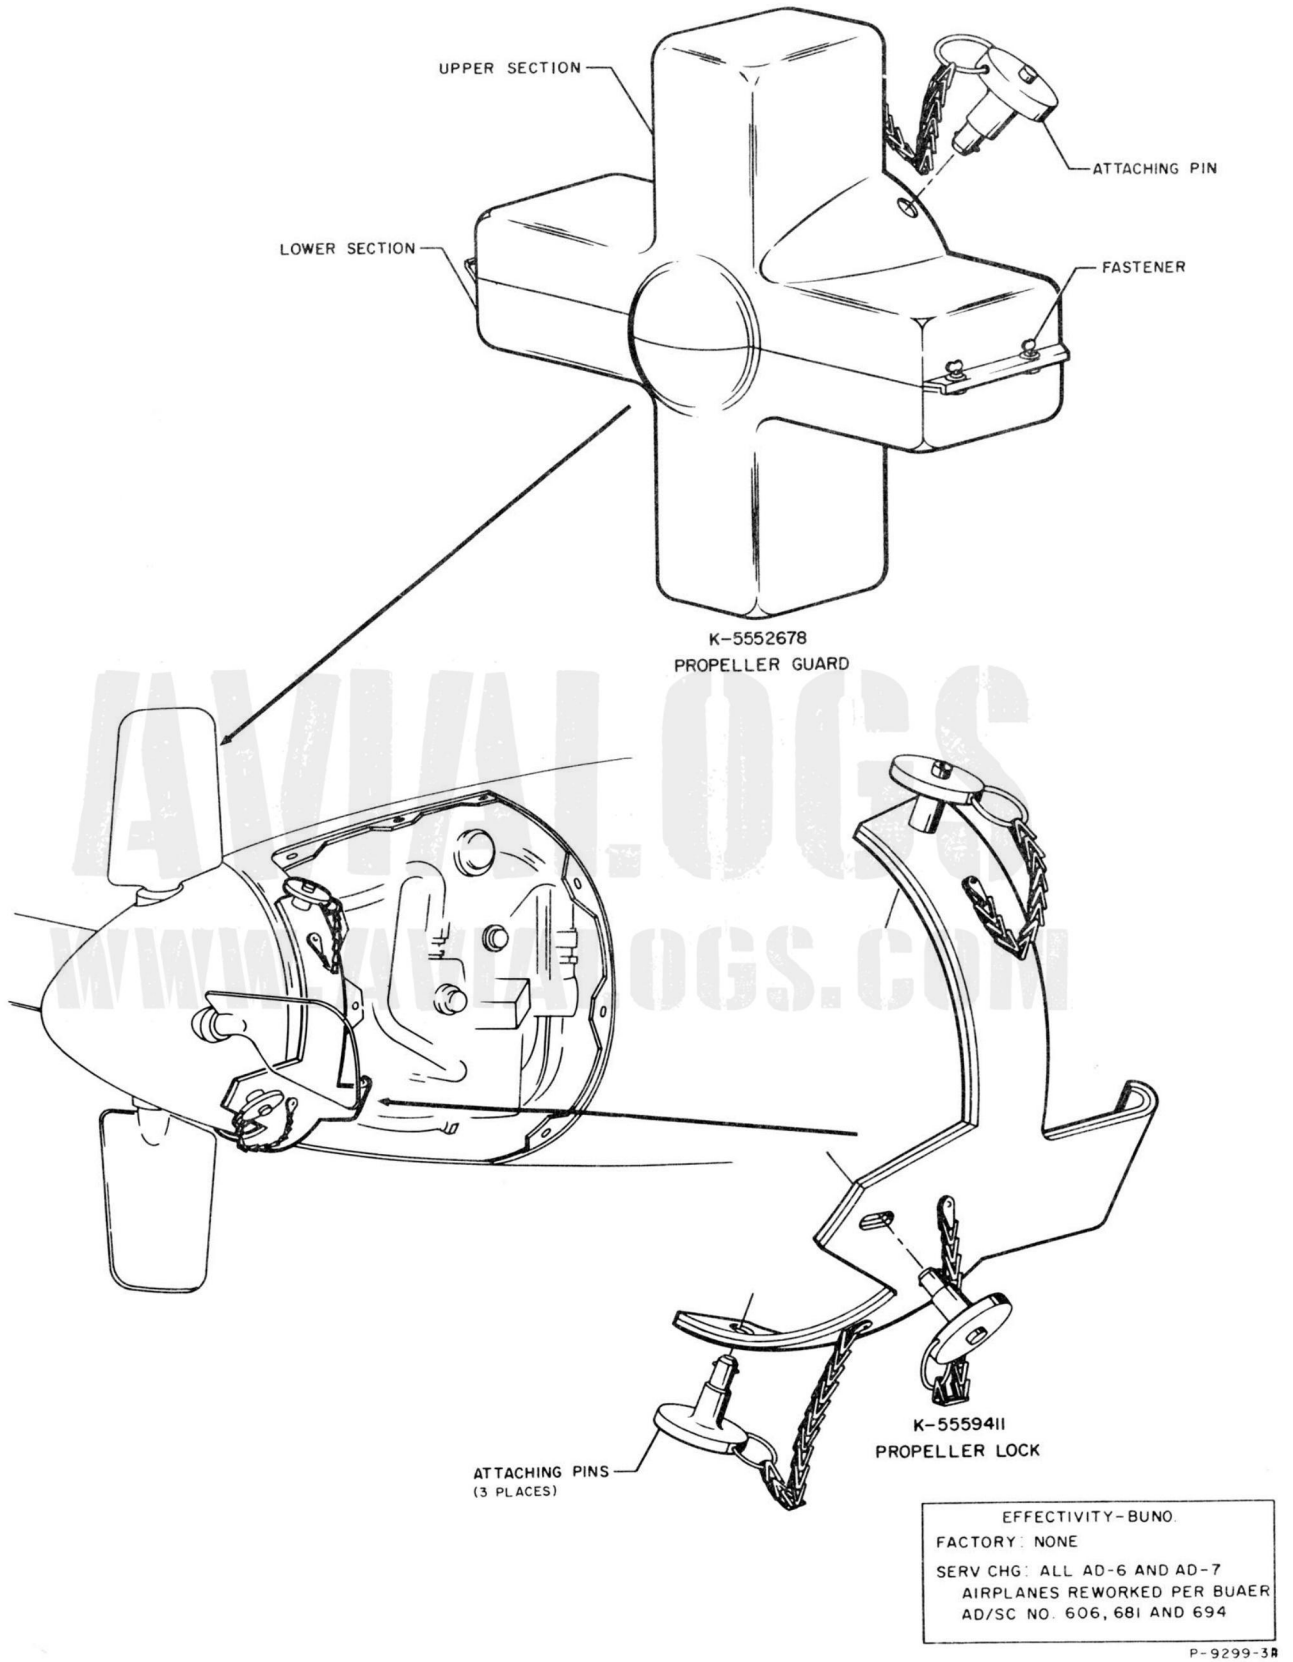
In-Flight Fueling Store Ground Handling Equipment (Sheet 1)
